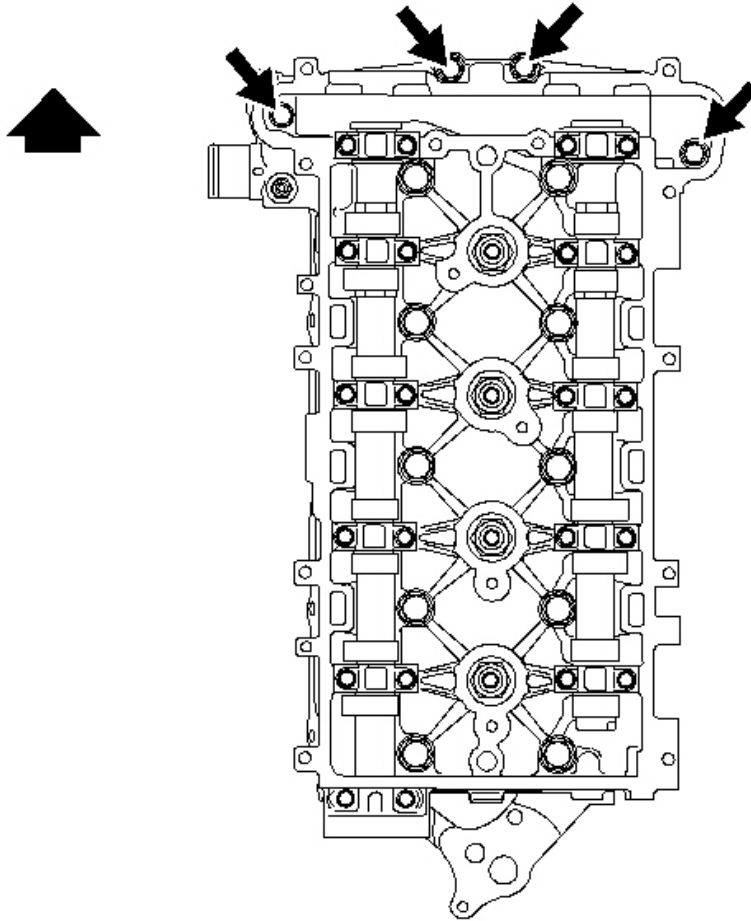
View Of Front Cylinder Head Crankcase Bolts
